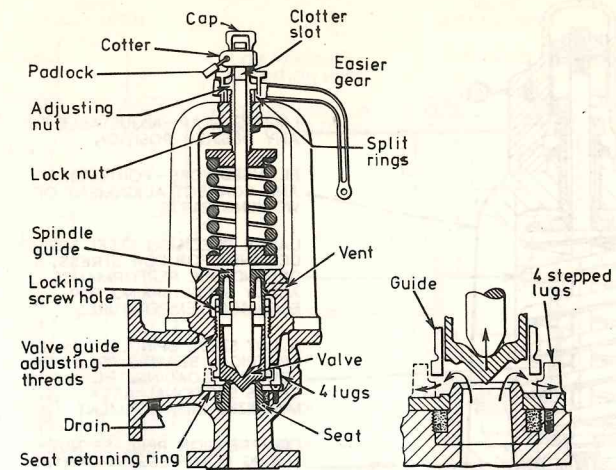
Hopkinson 'Hylif' single spring safety valve
